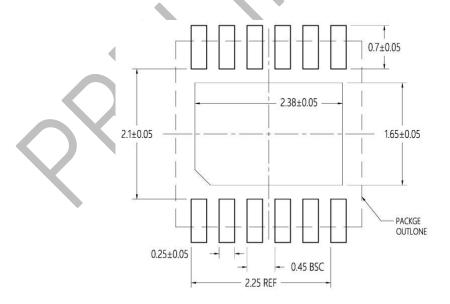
DFN12 Solder Pad Pitch and Dimensions
